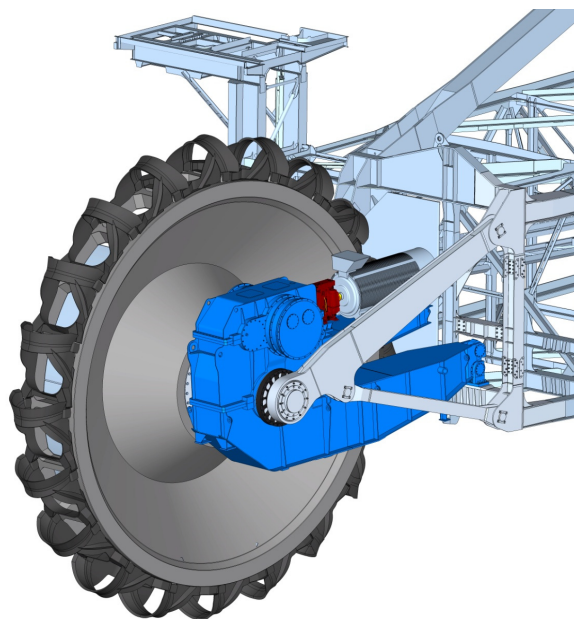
[15]. The single-walled bucket wheel with a single 1250 kW orbiting gearbox (manufactured by TAKRAF)
